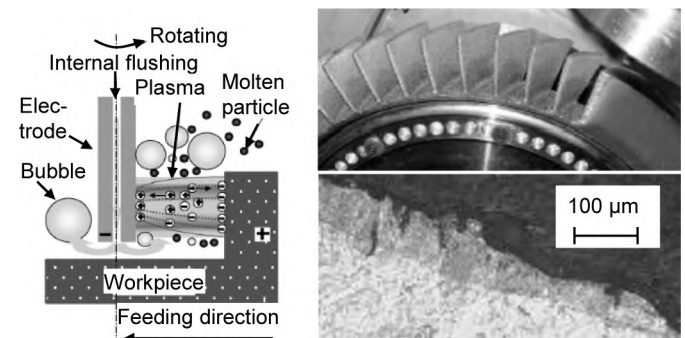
Schematic of HSEM/Blue Arc™ process mechanism and machining of superalloy blisk (Inconel 718) workpiece [205,222].
